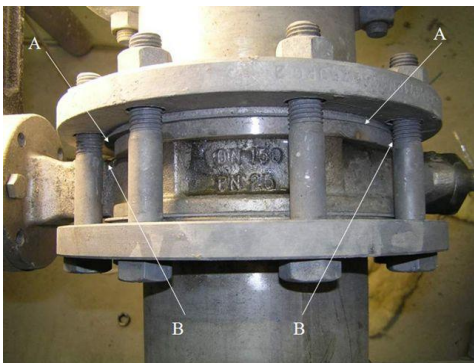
Preassemble the unit of the valve, mounting gaskets and flanges. Connect it by few fasteners and slightly tighten.
